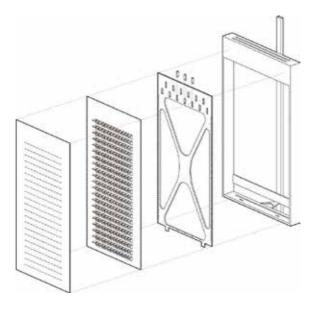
Exploded axonometric of FELT Plexiglas frame, aluminium frame and textile sheets 1 and 2 of the felt textile panel.
